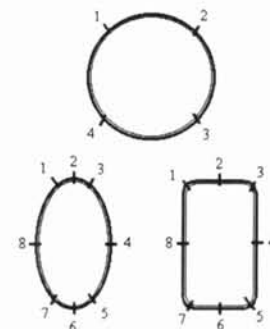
Measurement points used in CRSC inspection for different can shapes
